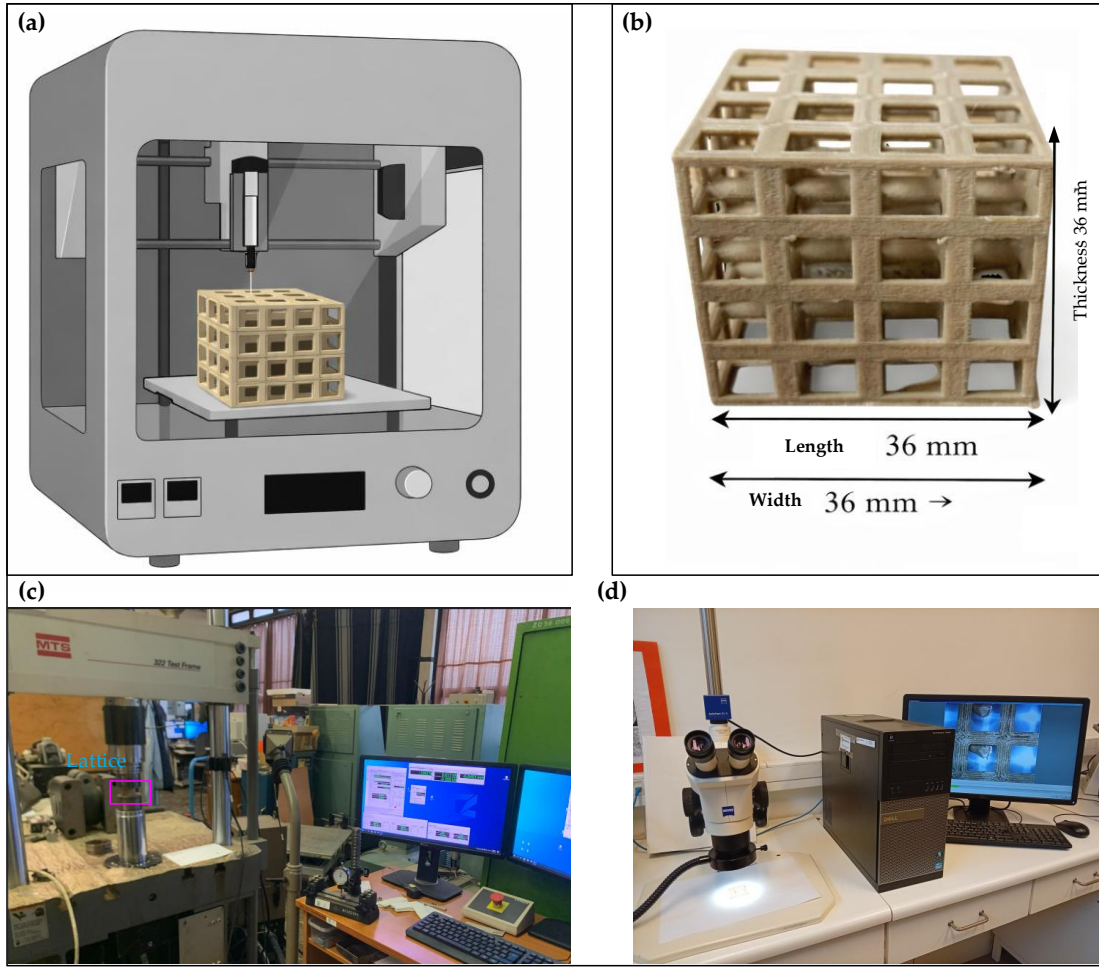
(a) Fabrication process of the FDM 3D-printed wood-PLA composite lattice; (b) fabricated lattice structure with dimensions; (c) compression test setup using the MTS 322 Test Frame universal testing machine; (d) microscopic examination setup using the Zeiss Stemi 2000-C.
